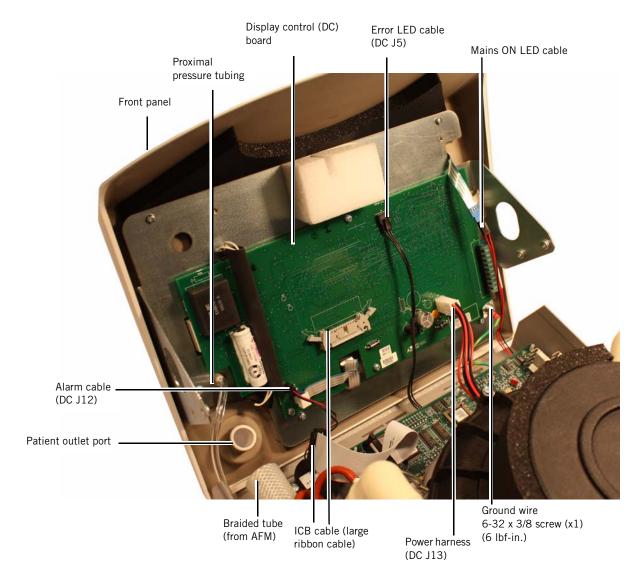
Front Panel Enclosure: Disconnecting the Cables and Proximal Pressure Tubing
